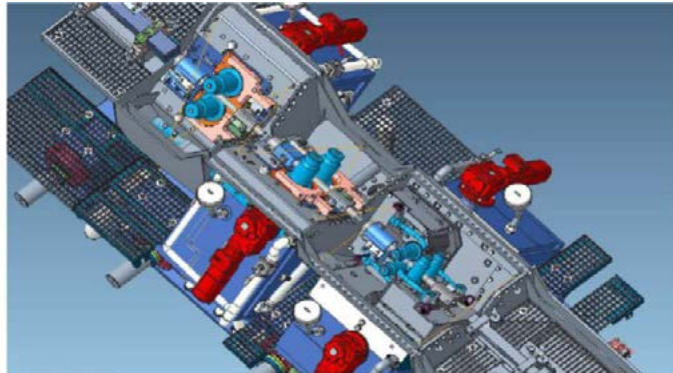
Disposition of new wire rod calibrator Meer Drive SMS.
